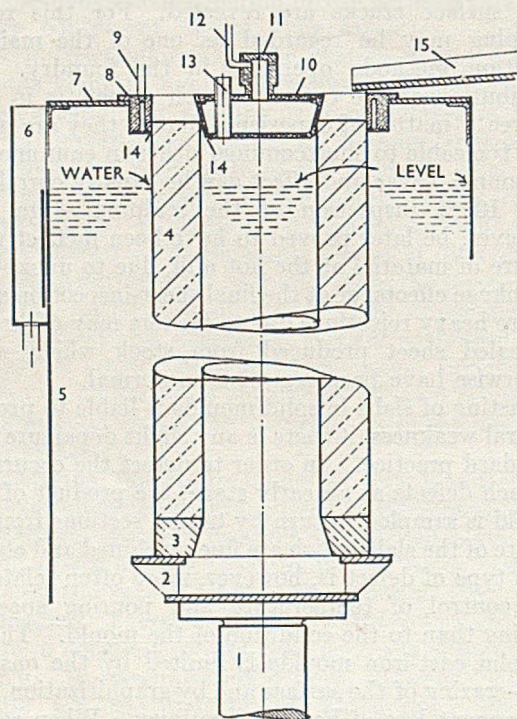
Equipment for Direct-Chill-Casting a Hollow Billet 20 in. in Outside Dia. × 10½ in. dia. Bore.
